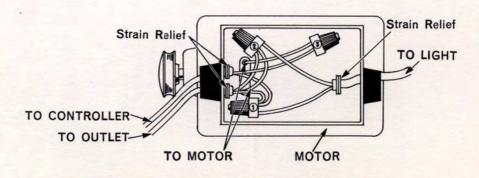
B.Z. 60 Motor Terminal Connection Guide.
